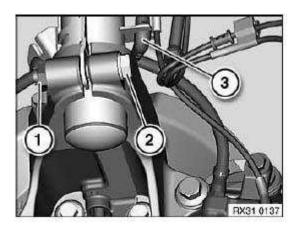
Identifying Nut, Pulse Generator And Screw Courtesy of BMW OF NORTH AMERICA, INC.
